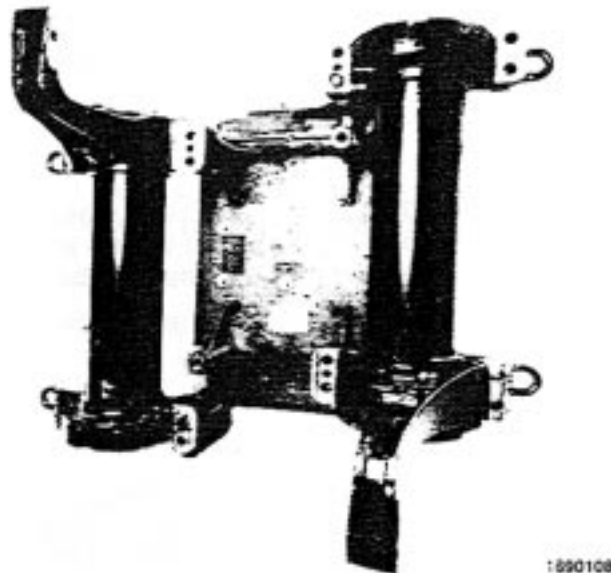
Housing Turnover Device - Shown are Two (2) Housings Mounted on the Face Plate
